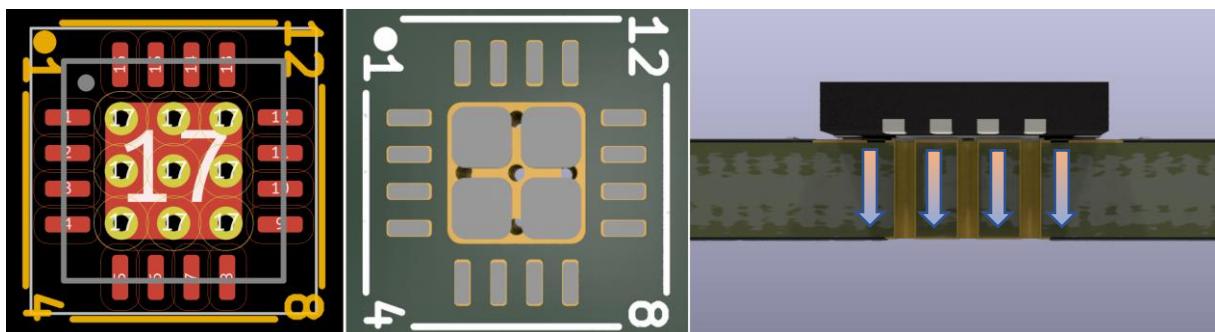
QFP footprint with visible solder paste apertures on the heatsink pad.
